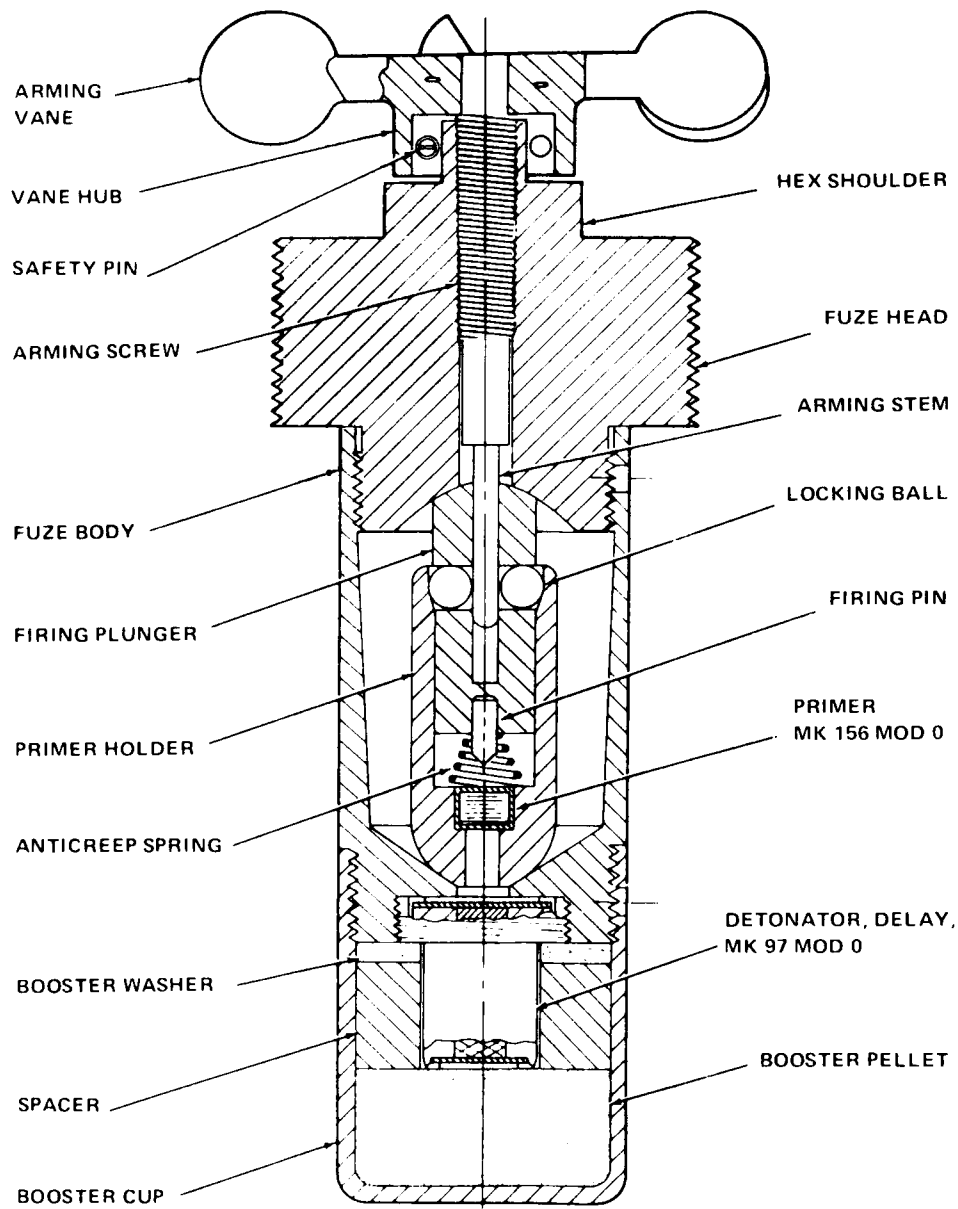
Mechanical Bomb Fuze M918 — Cutaway View
